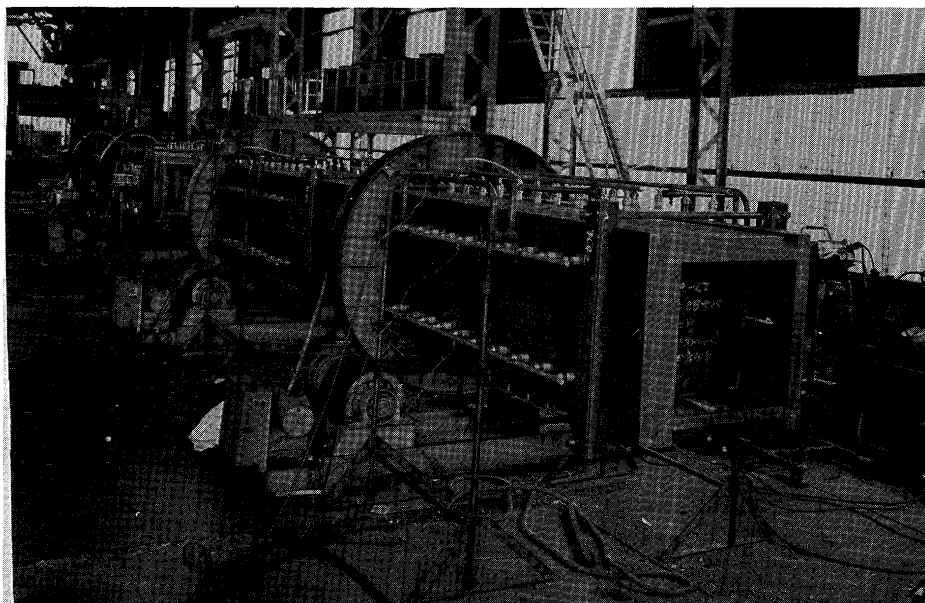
Preheating units (multi nozzle gas torch) combined with rotative positioner.
